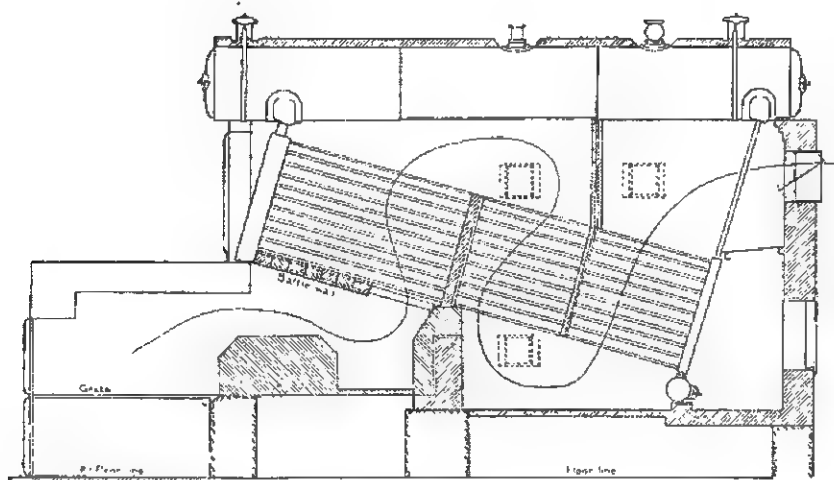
IDEAL SECTION SHOWING ADDITIONAL BAFFLE WALL AND AN ELONGATED FIRE BOX.
